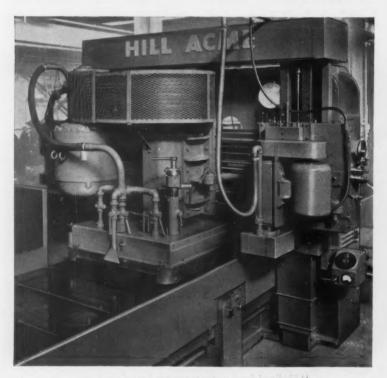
Close-up view of wheel-head and table of Hill vertical surface grinder
